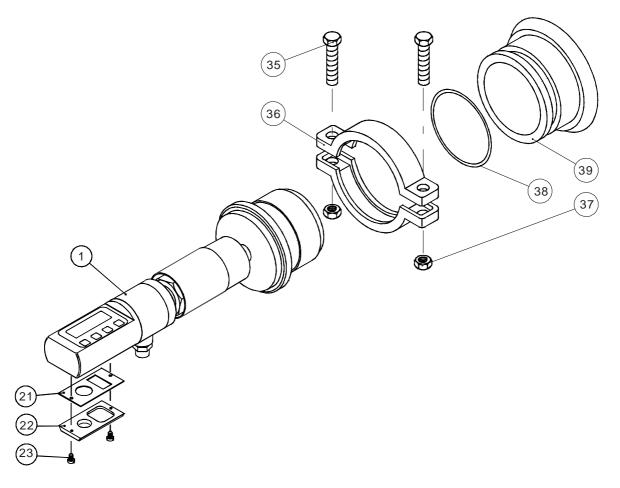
Parts list: VDU with Sandvik-clamp process connection , sensor 1 (master)
